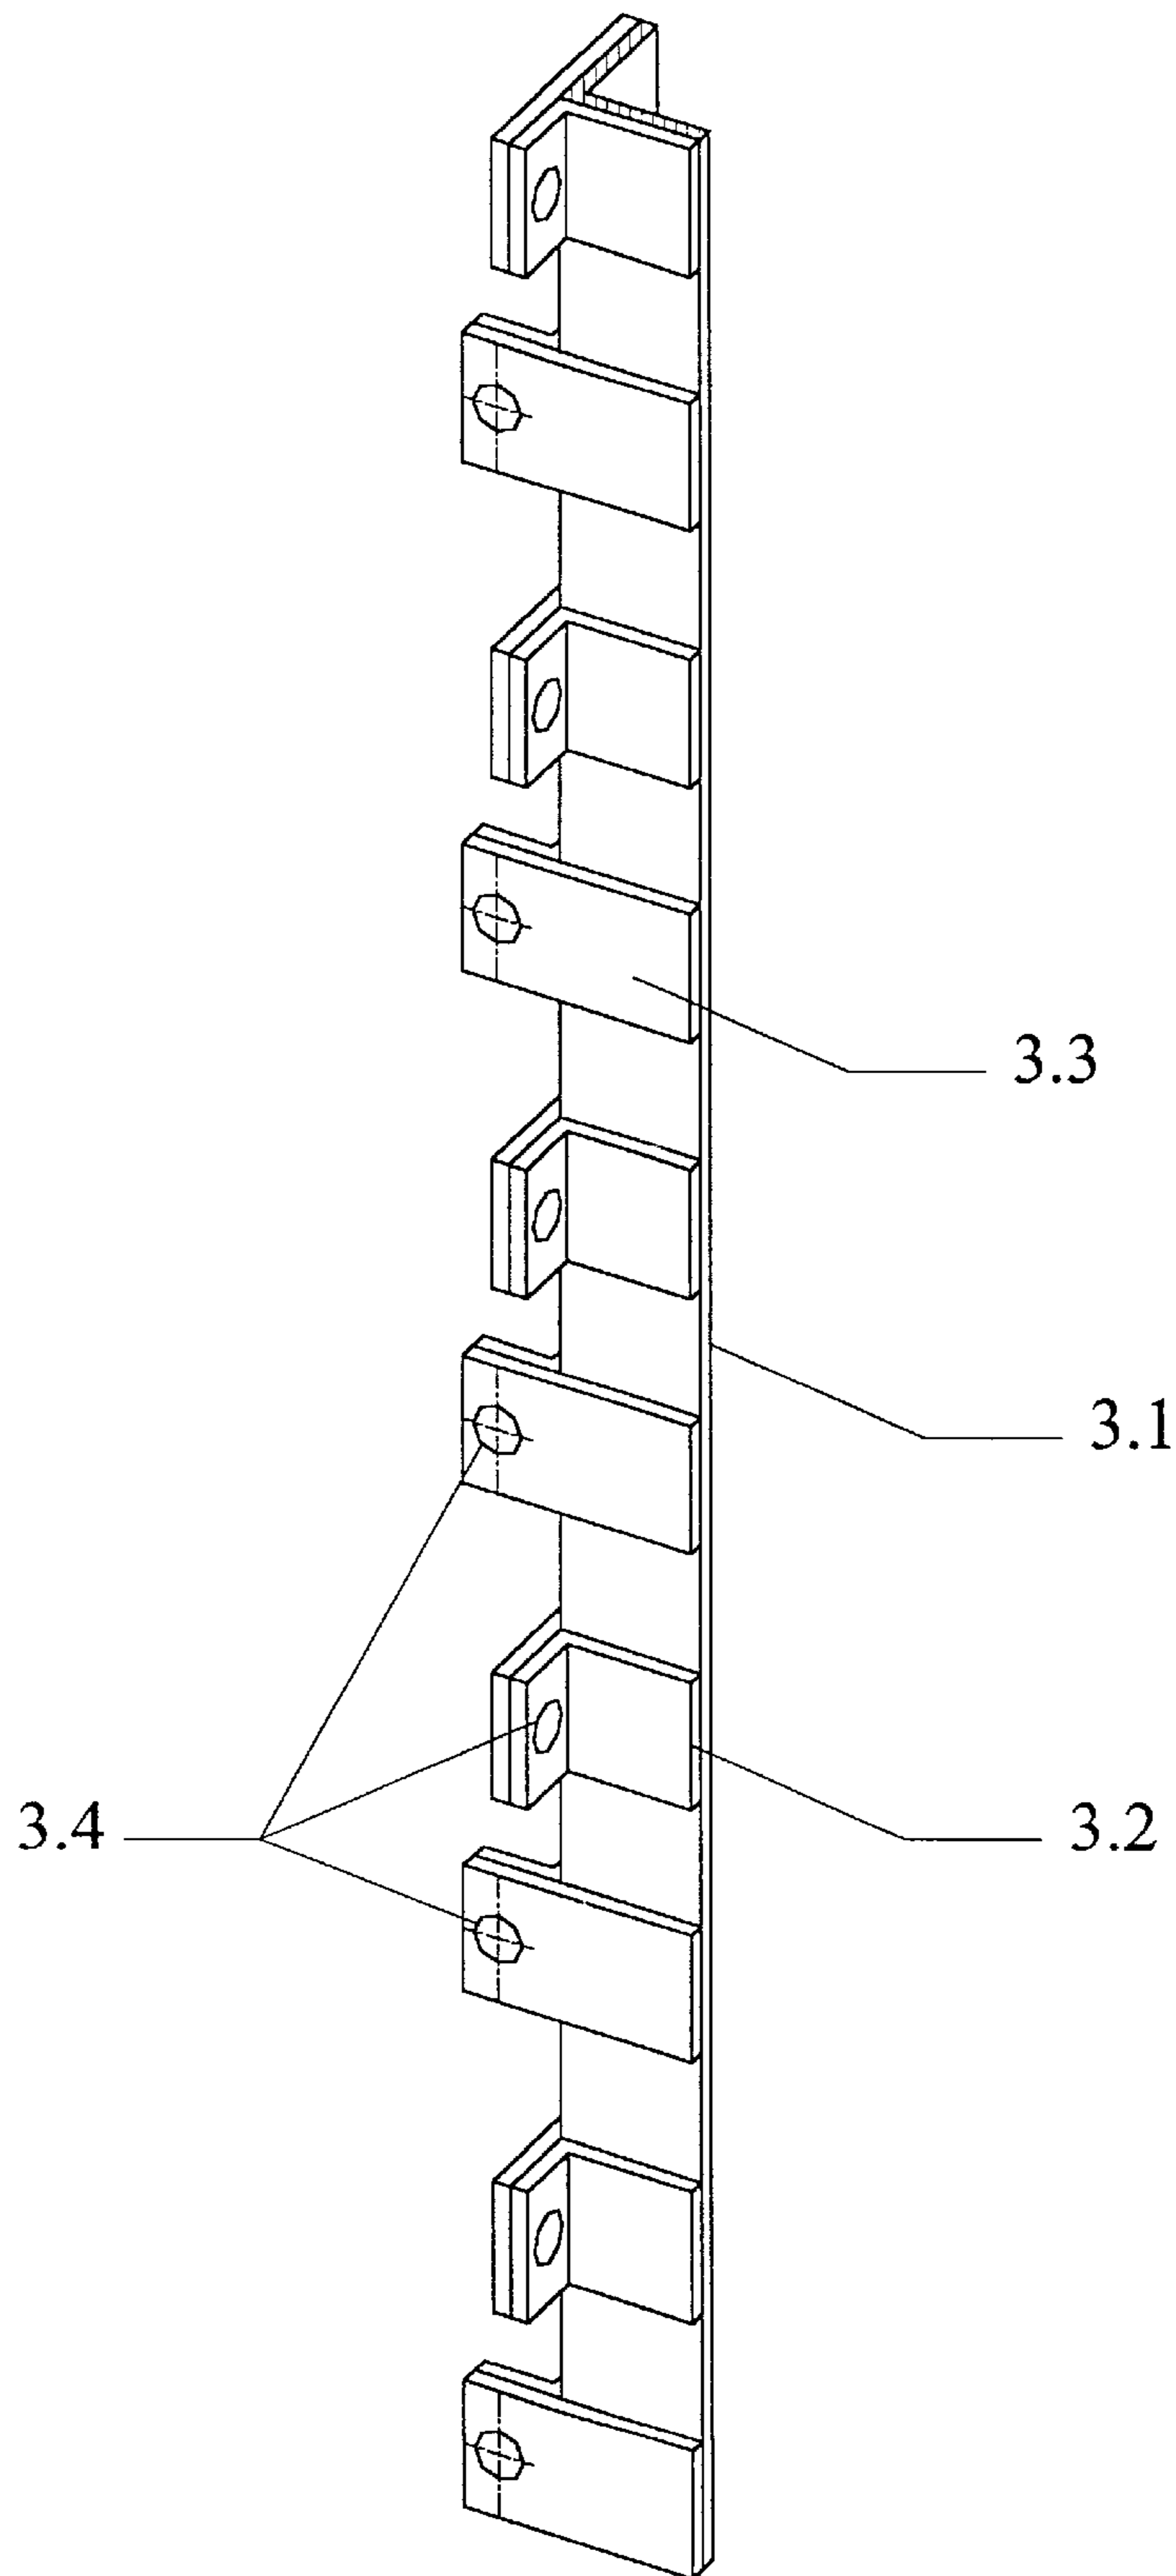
Typical Isometric View of One Edge in the Pressure Casing 1.
